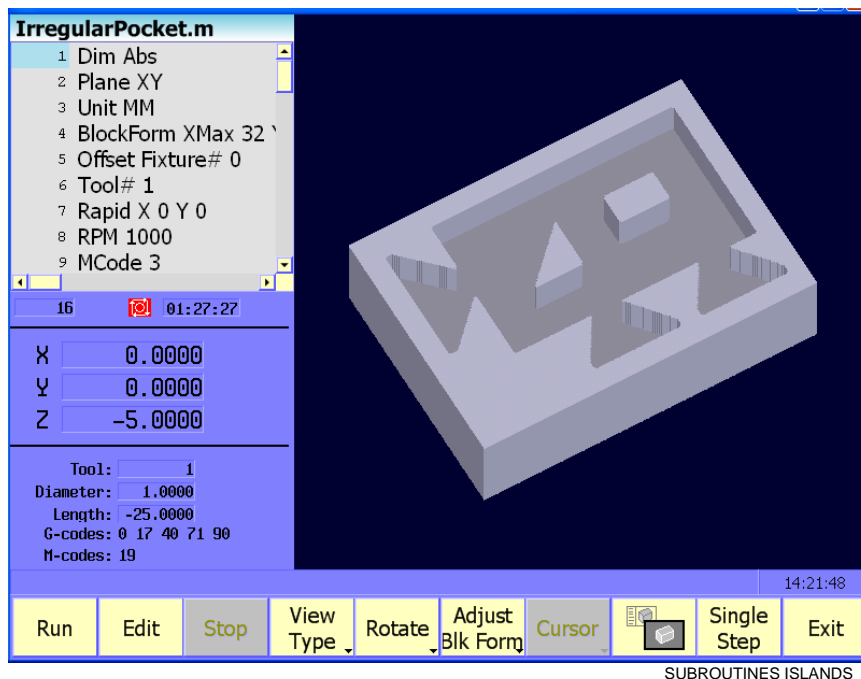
, Subroutines Pockets with Islands Example Workpiece
